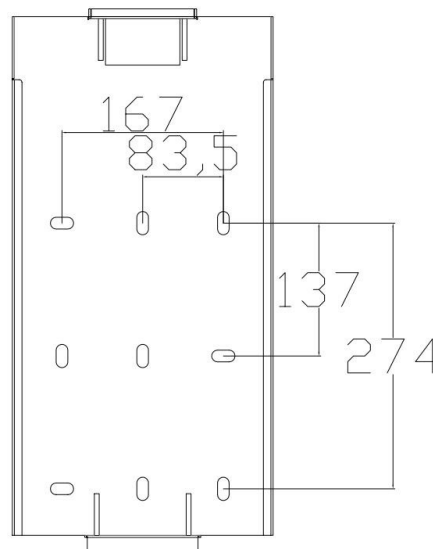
Overall Dimensions Of The Wall-Mounted Device
